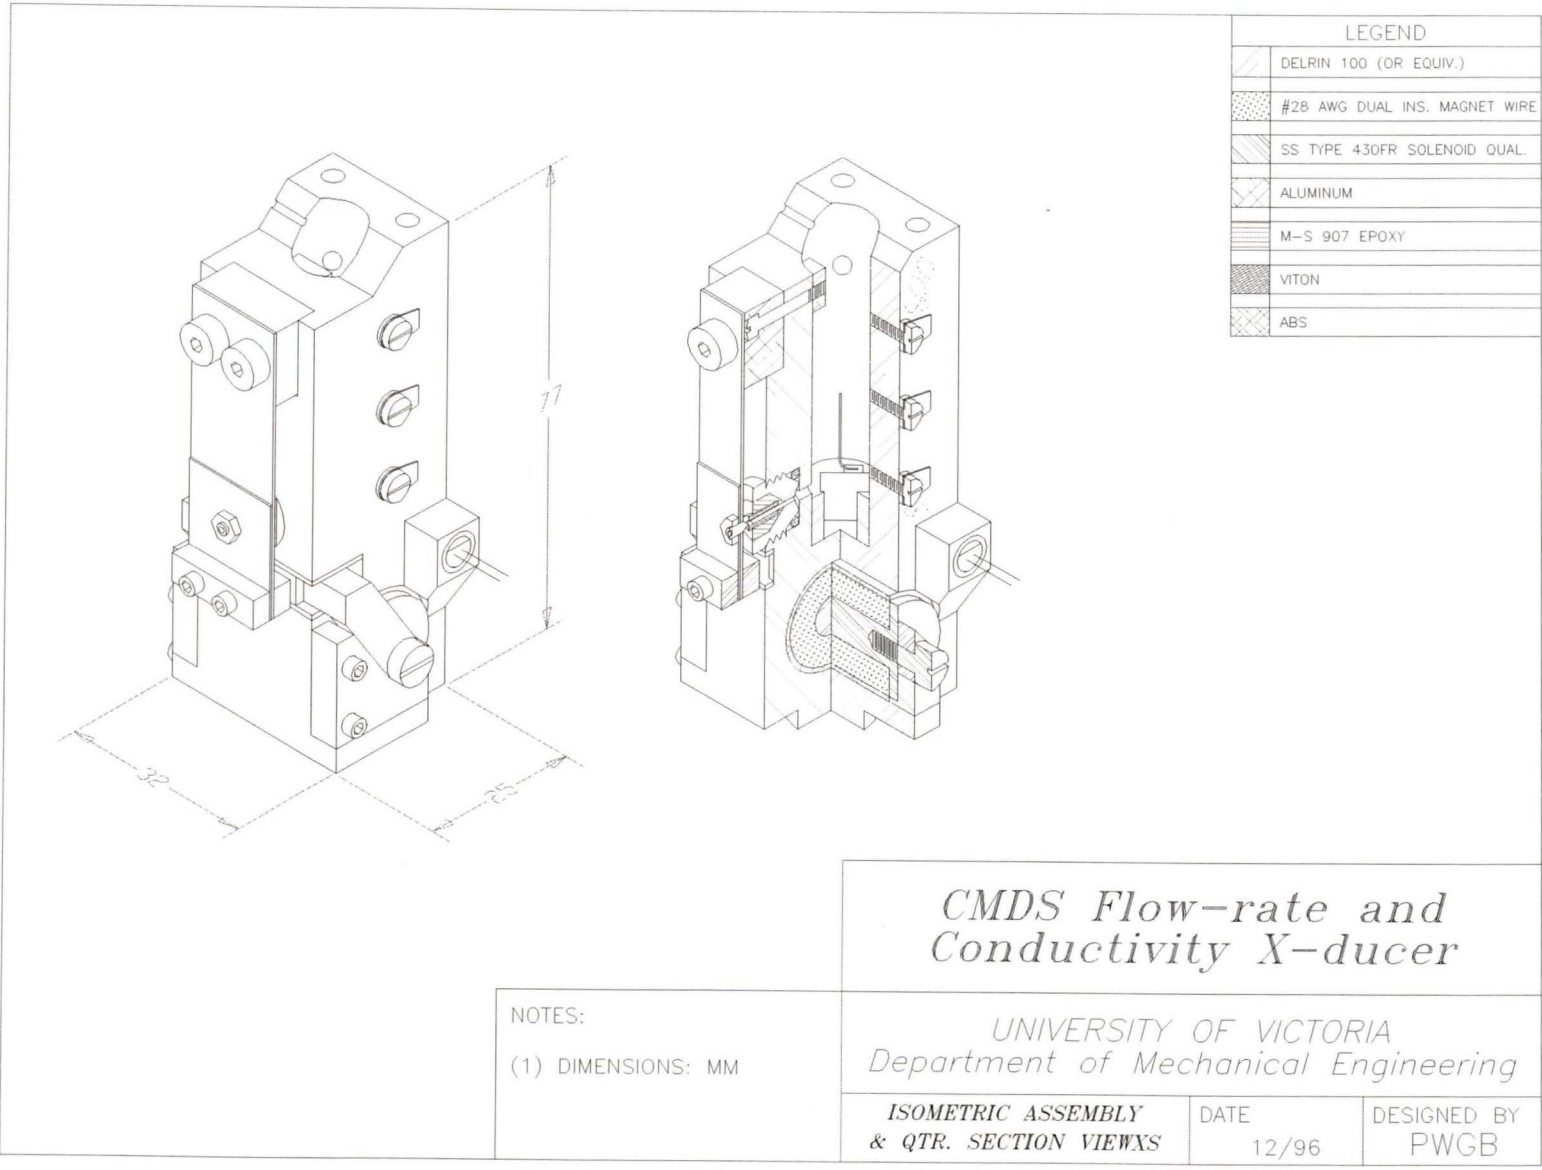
Isometric Assembly and Quarter Section Views of FRACT
